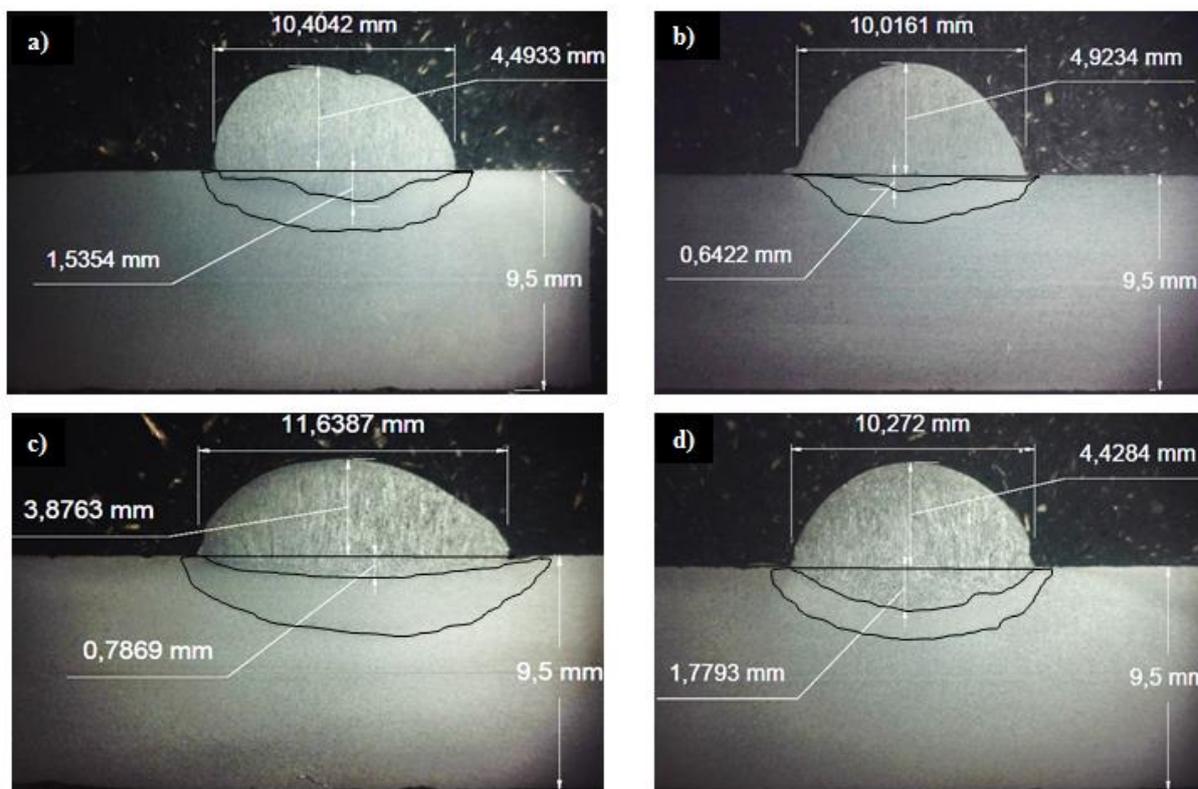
Cross sections of the weld bead (a) CW-GMAW pulling, (b) CW-GMAW pushing, (c) EW-GMAW pulling and (d) EW-GMAW pushing
